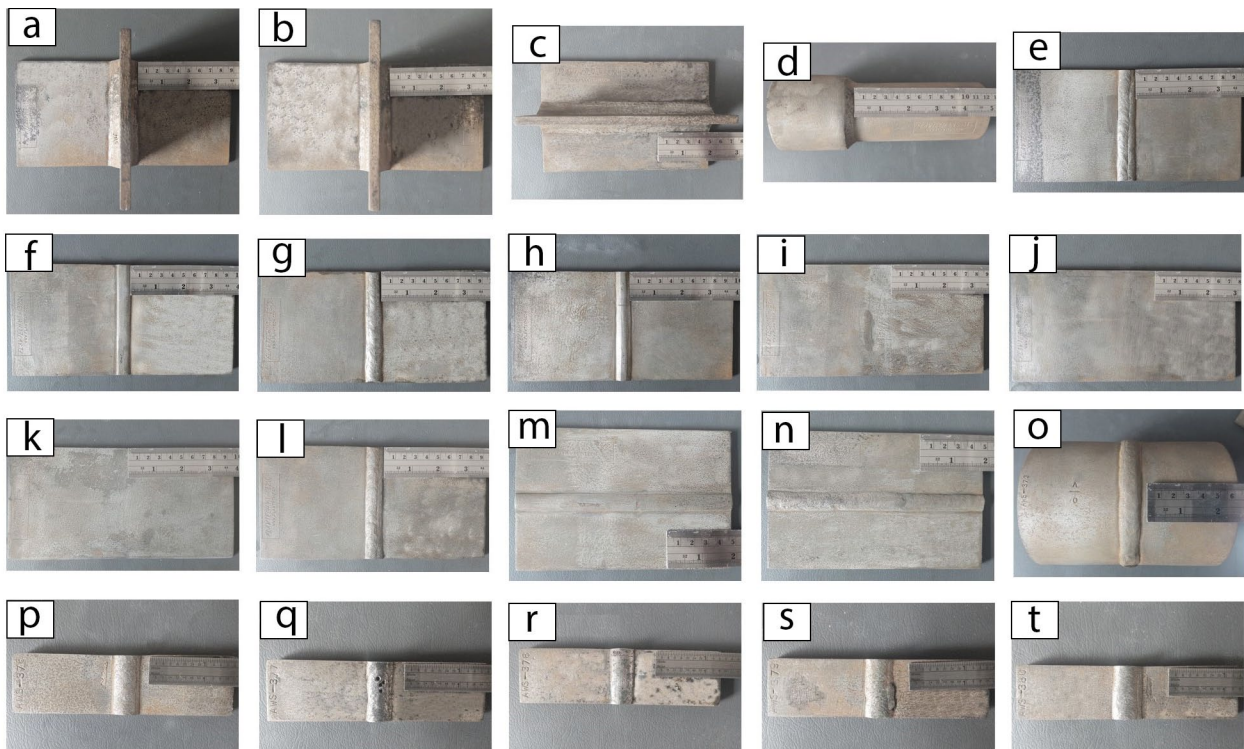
Specimens fillet welded (a, b, c and d) and groove (e-t) of ASTM A36 steel
